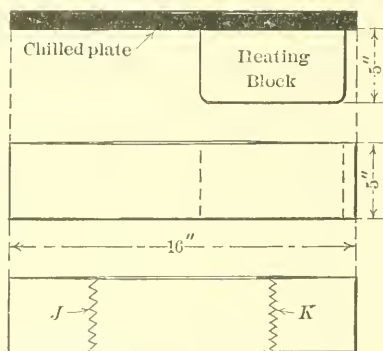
CHILLED PLATE WITH HEATING BLOCK ATTACHED AND SEPARATED CASTING
